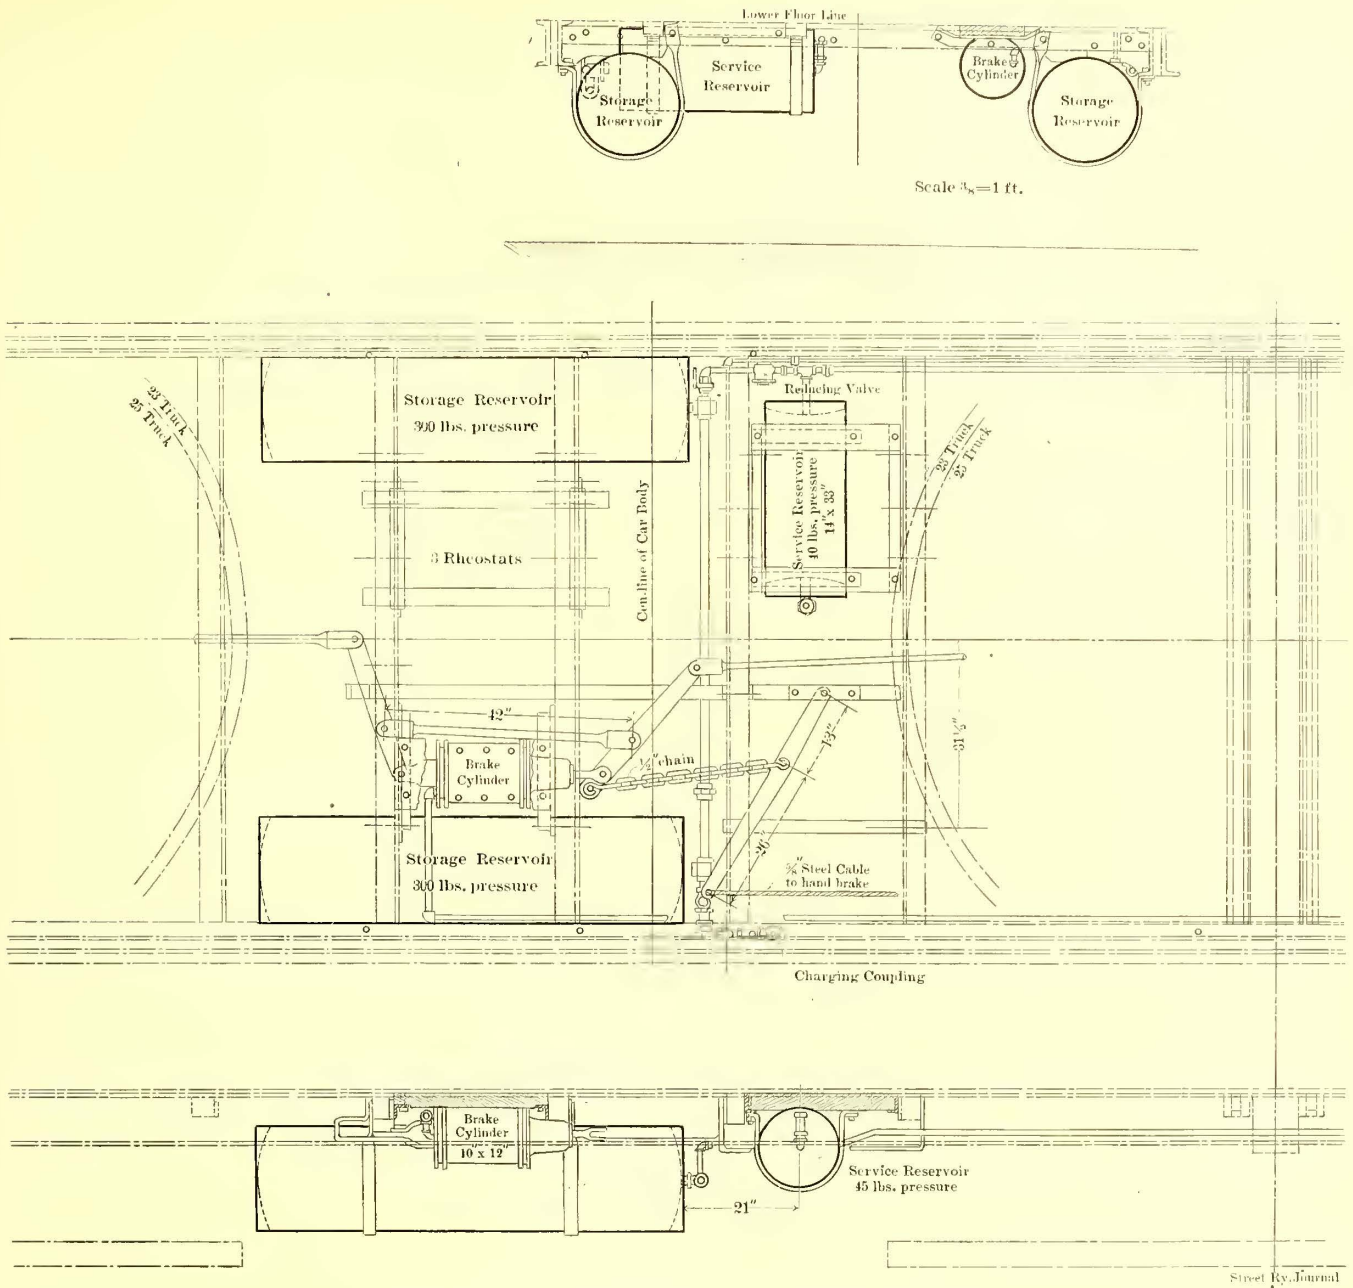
STORAGE AIR BRAKE EQUIPMENT ON CAR
